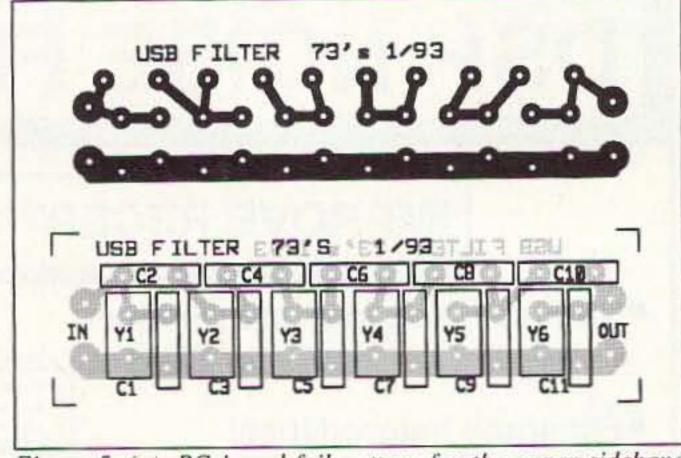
(a). PC board foil pattern for the upper sideband filter. (b). Parts placement diagram.
